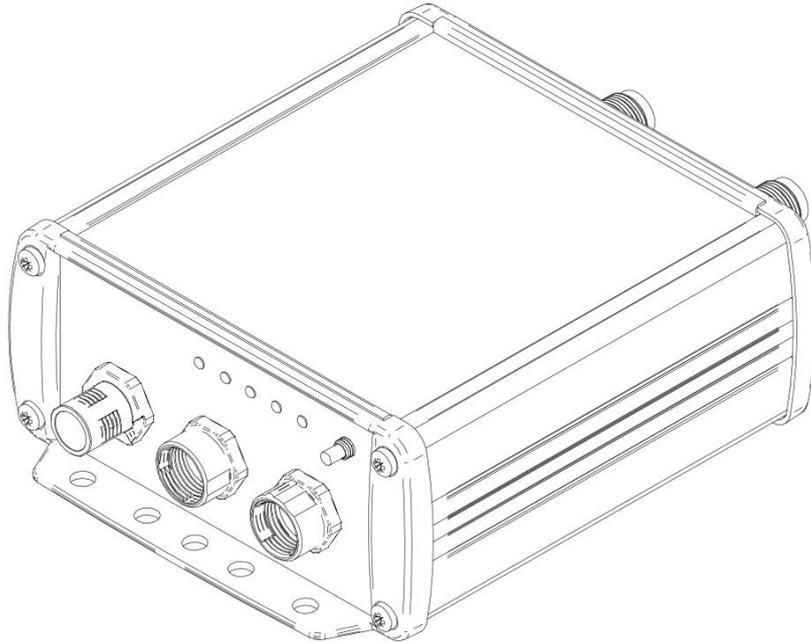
Proton R4320P Technical Drawings – 3D view
